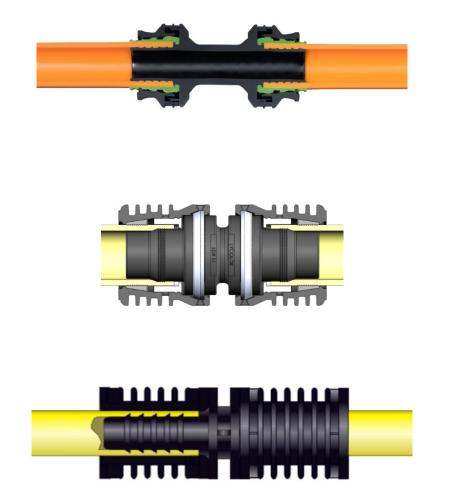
Cut aways of axial compression ring fitting designs, with pipe installed (Courtesy of Viega (top), Lyall (center, bottom)).
